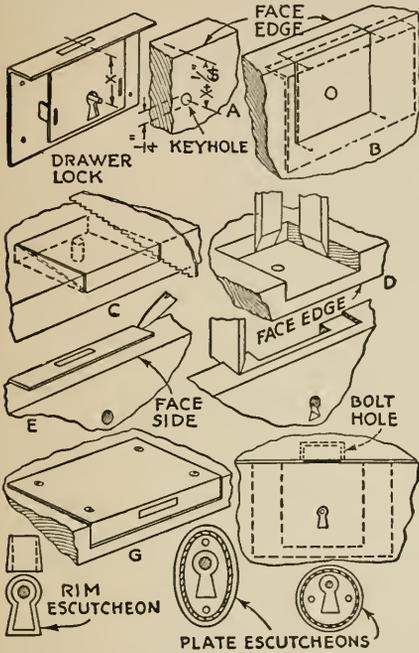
By following these steps, the amateur cabinetmaker can fit drawer locks easily and accurately.
